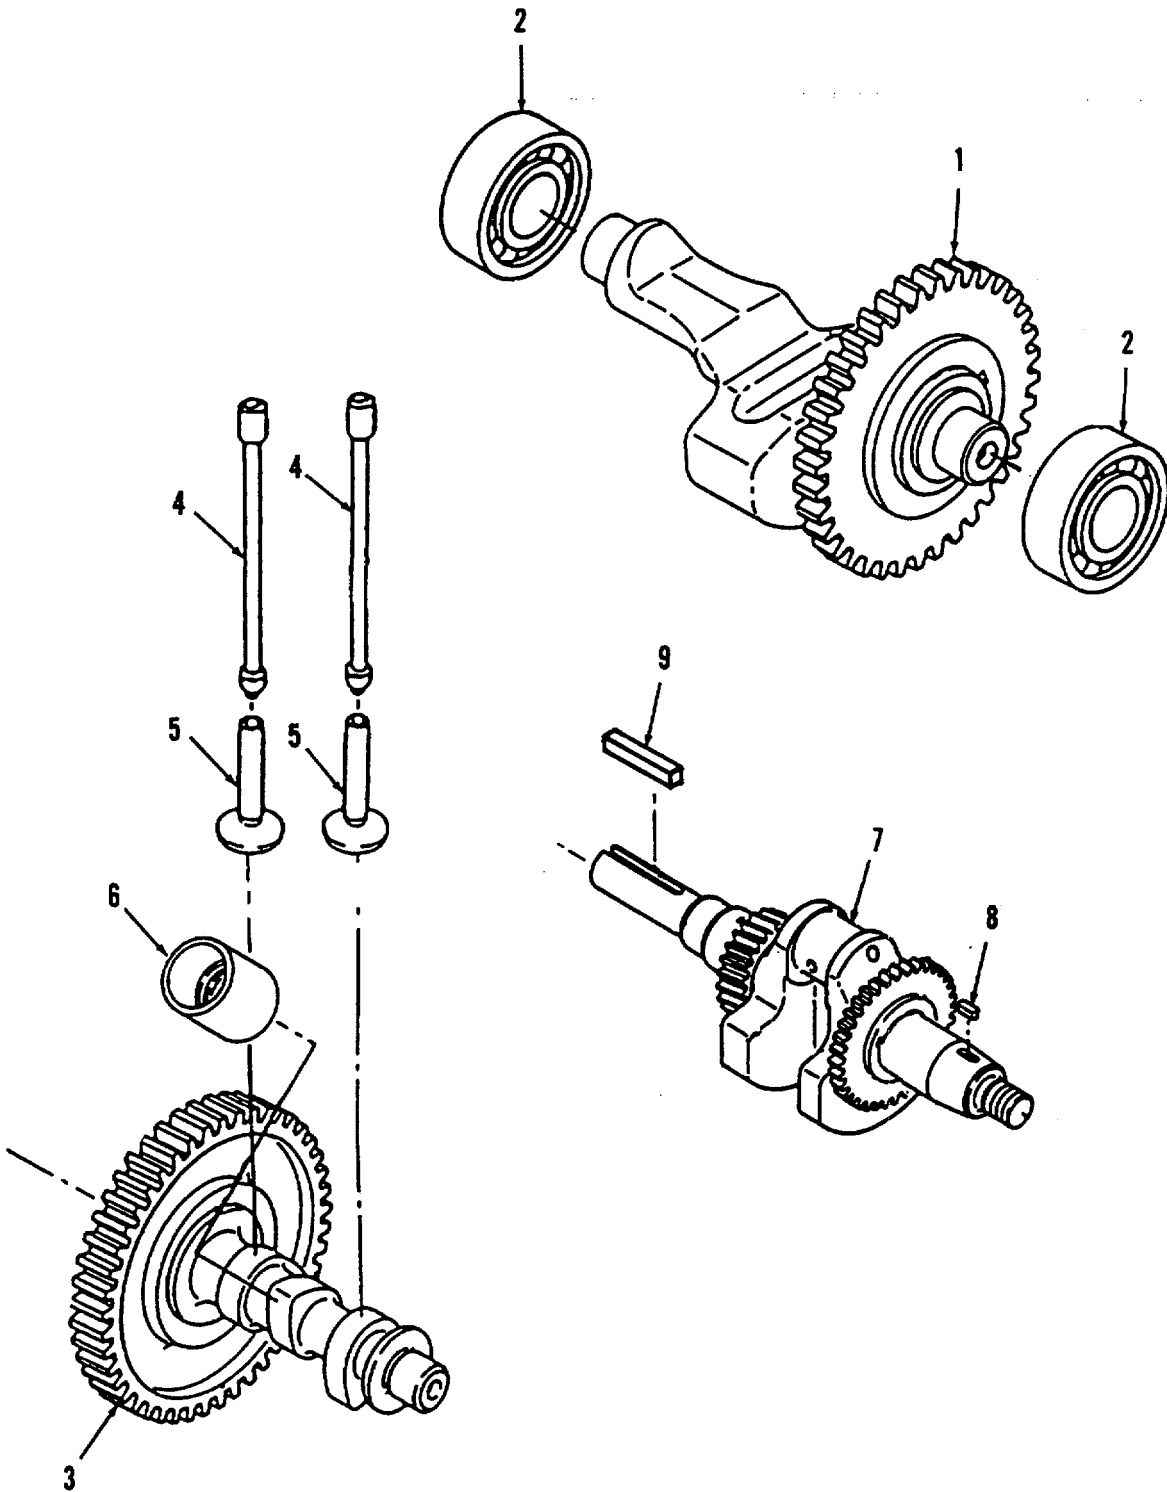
Balancer Shaft Assembly, Camshaft Assembly, and Crankshaft Assembly
